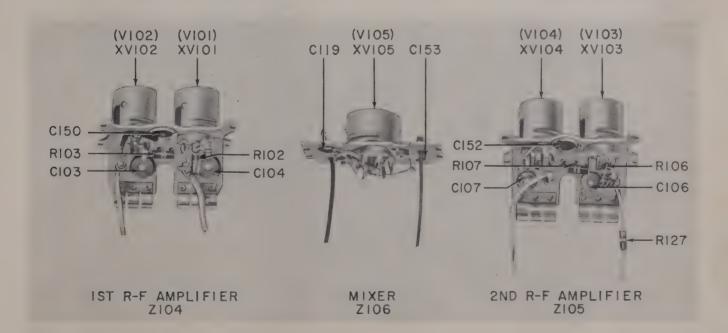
Socket Assemblies from R-F Amplifier Section of Preselector
